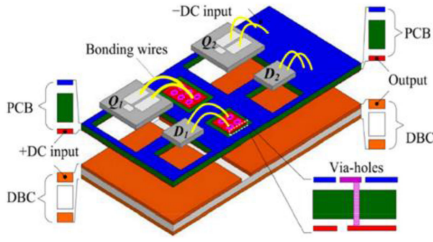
Power chip-on-chip with PCB-DBC; exploded view of 3-D rendition [43], ©[2017] IEEE.
